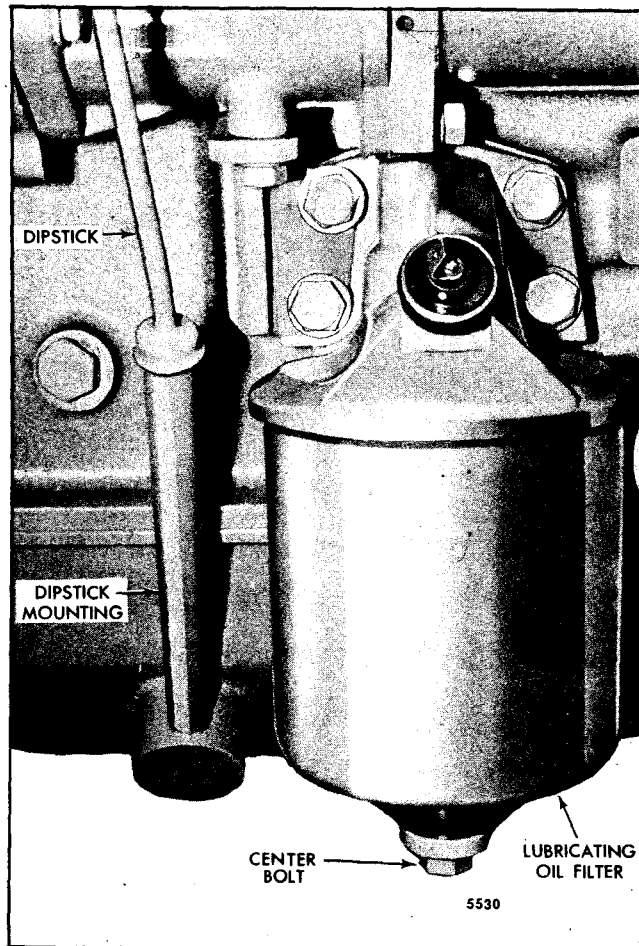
Lubricating Oil Filter Mounting and Dipstick Location
